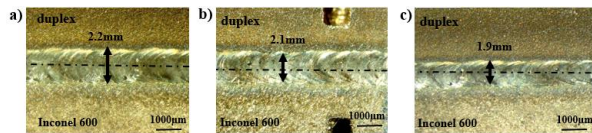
Effect of welding speed on the weld bead width and appearance for a)200mm/min, b) 400mm/min, c)600mm/min.
